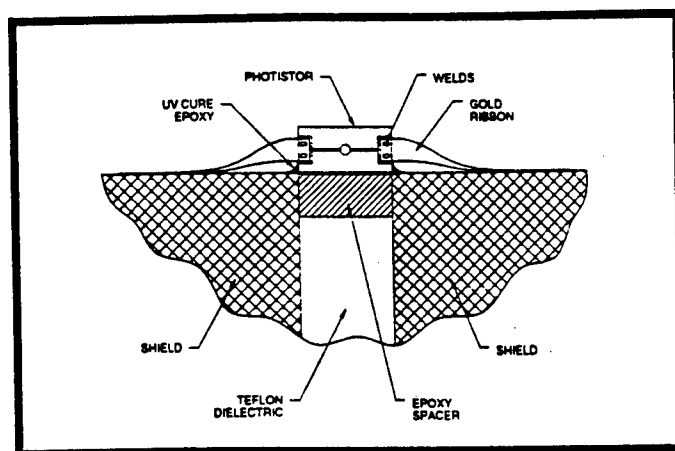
PHOTISTOR™ SWITCH INSTALLATION - SIDE
